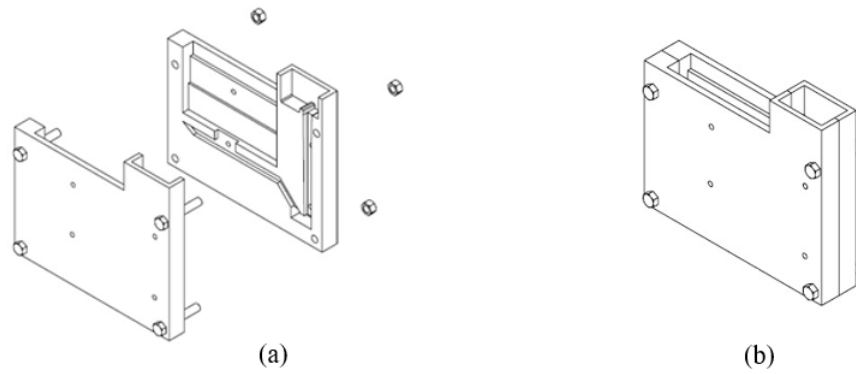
Permanent mold: a) Constituent halves b) Assembly (Ngigi, 2018)
